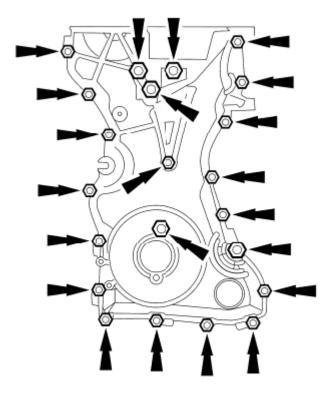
Locating Bolts And CKP Sensor Courtesy of FORD MOTOR CO.
